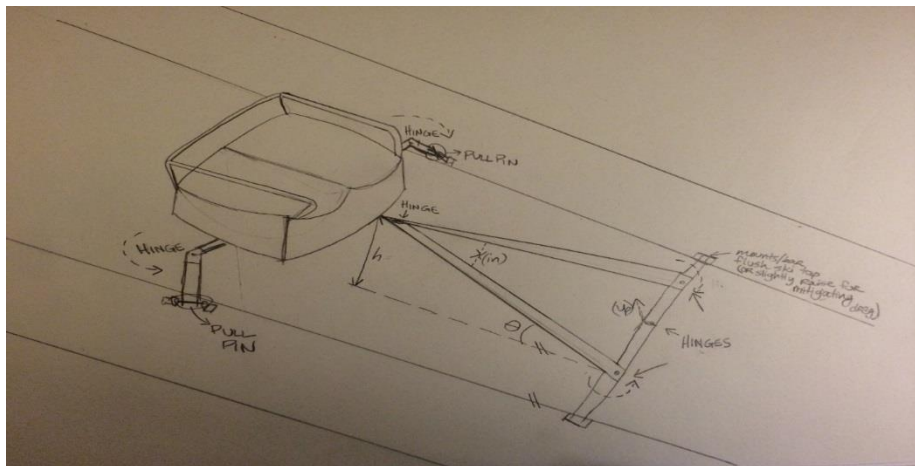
System Design Option 1: Compressed Ski Seat Steering; Molded Seat; Side-to-Side Collapsibility; Pins for Universal Mounting
